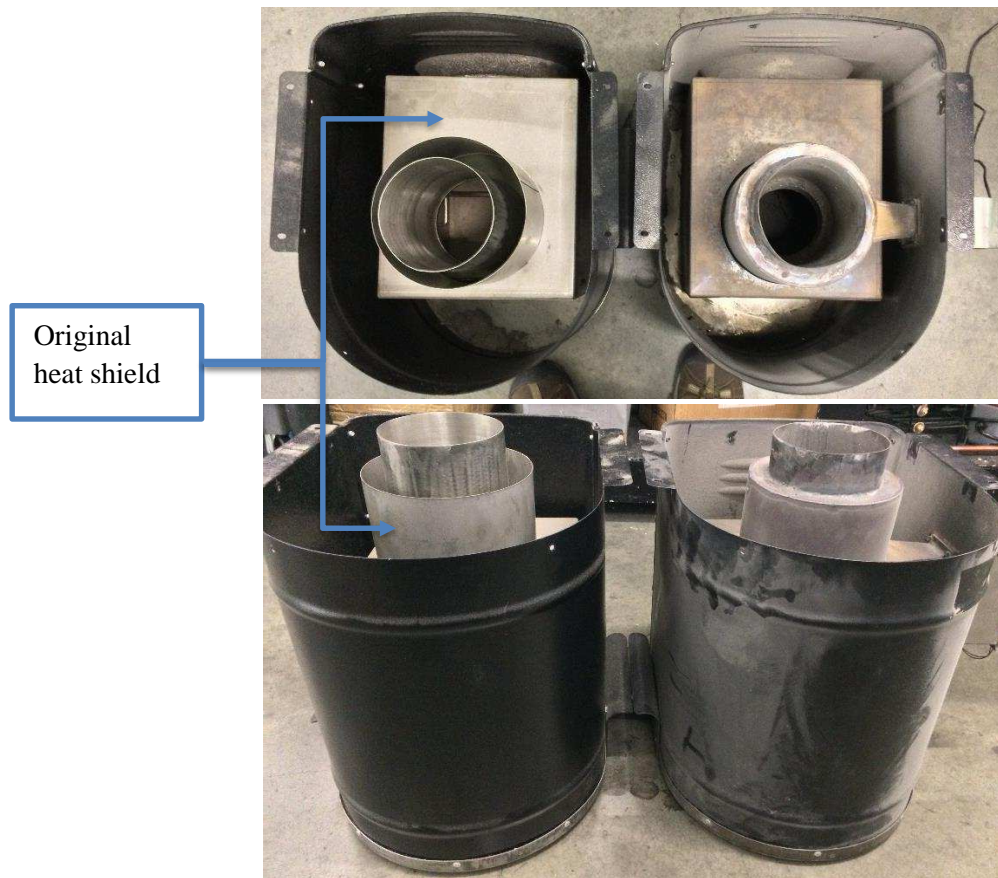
Left - Original combustion chamber, Right - Combustion chamber with prototype nozzle installed
